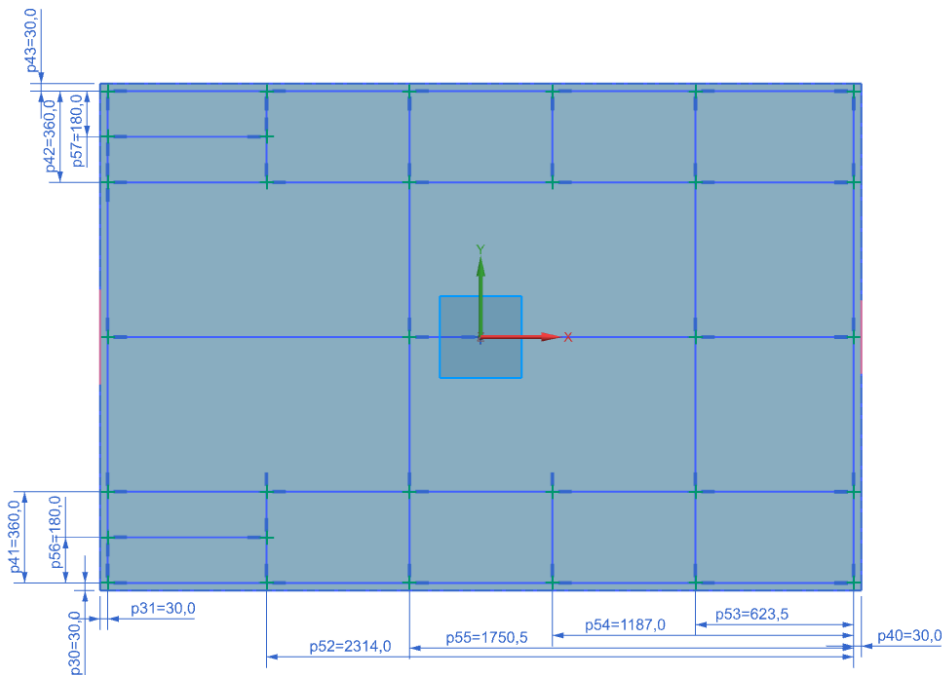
Layout of beams used in platform sub-frame dimensions in mm
